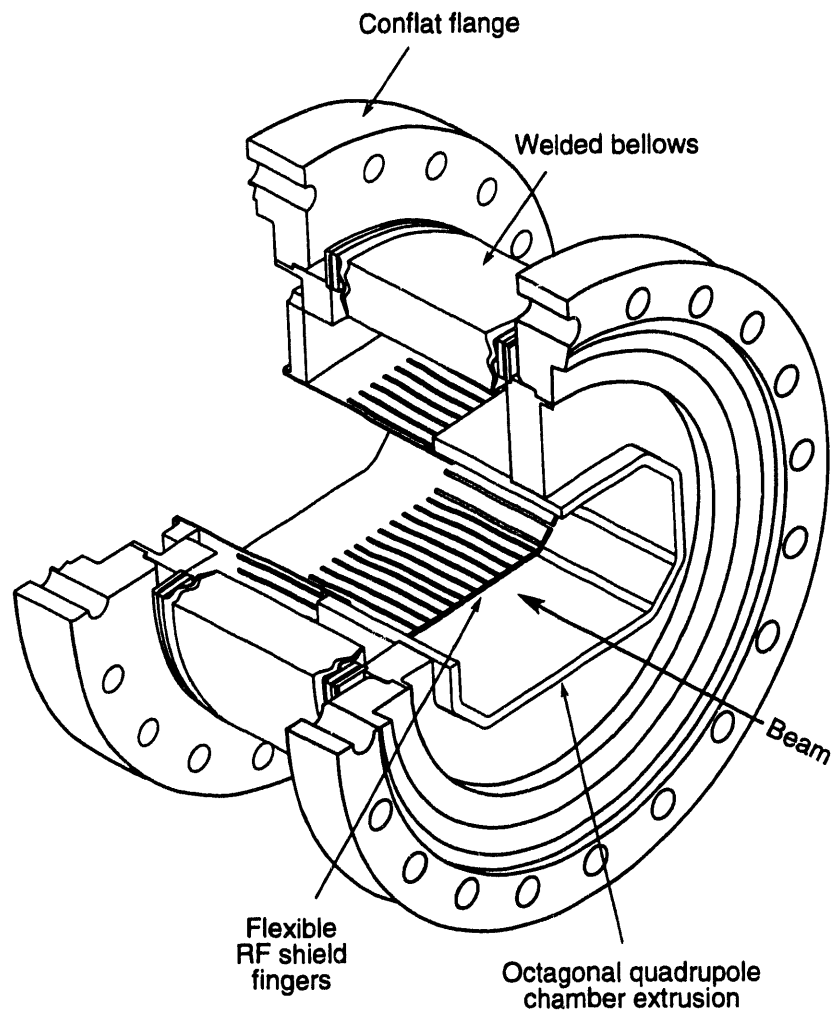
CAD illustration of the HER arc bellows, showing inner RF shield.
